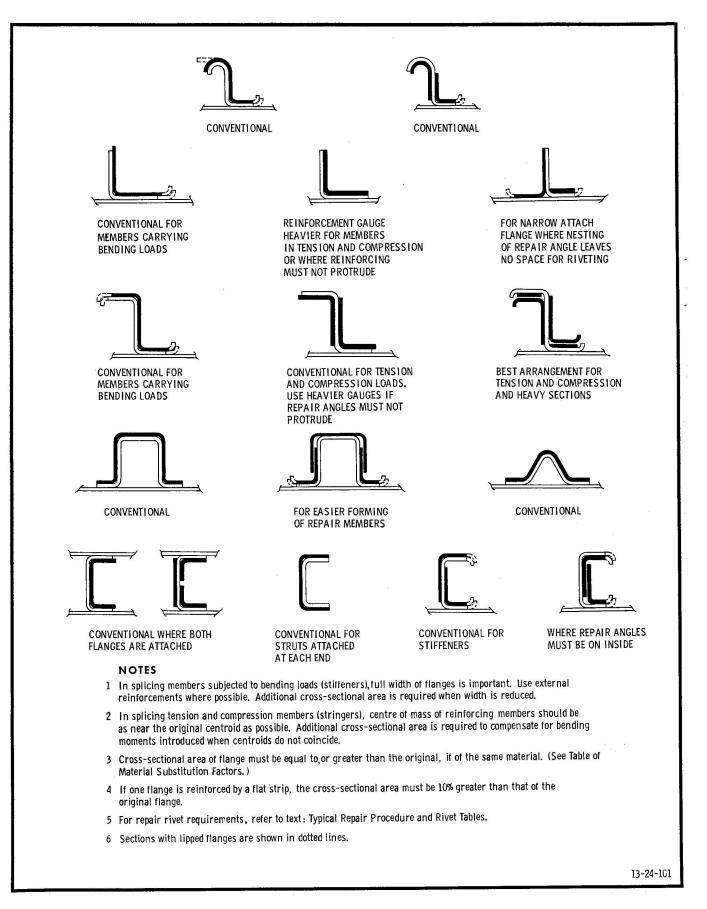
(Sheet 1 of 2) Formed and Extruded Section Splice - Arrangement of Repair Members
